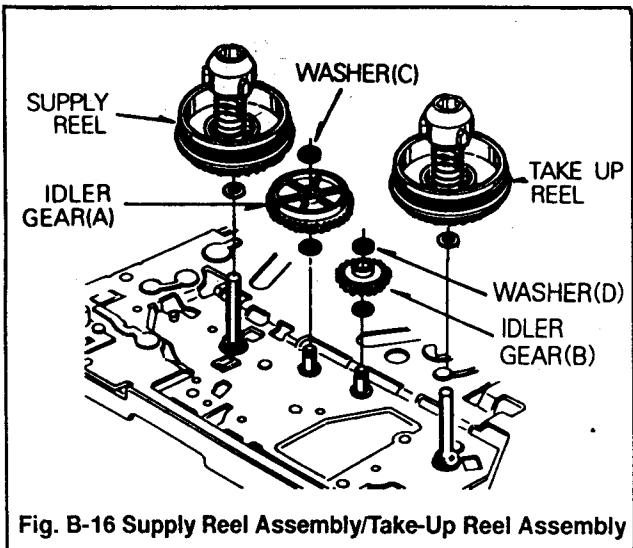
Supply Reel Assembly/Take-Up Reel Assembly
